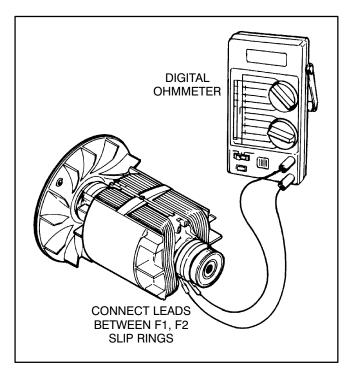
TESTING ROTOR FOR AN OPEN
